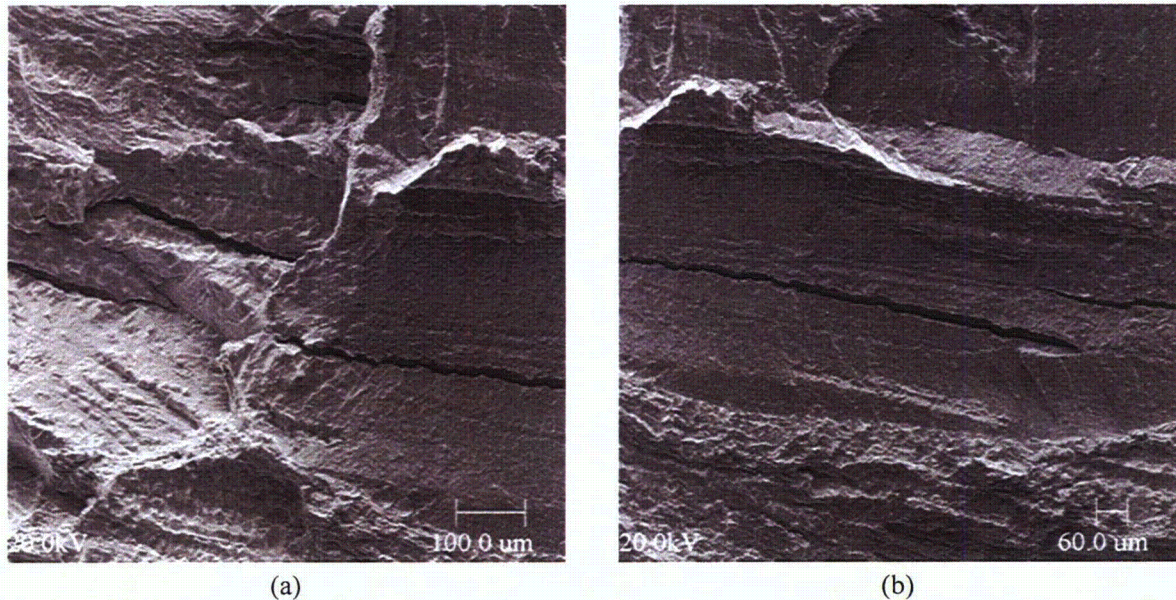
Micrographs of the fracture surface of Specimen BCR-01 at locations (a) 1 and (b) 2 in Fig. 60.
